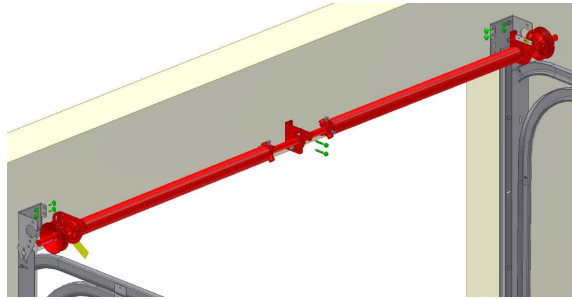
Shaft with springs, lifting cable drums and bearing plates
